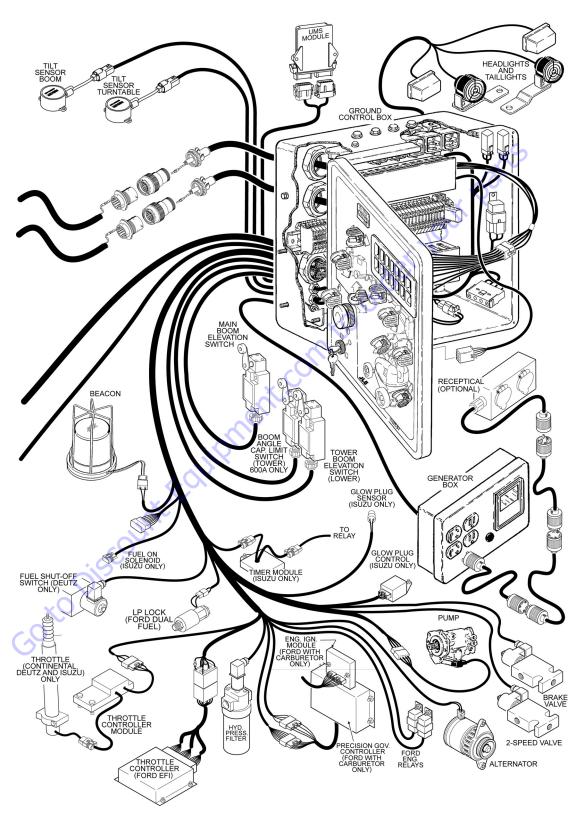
Electrical Components Installation (Prior to S/N 0300064432) - Sheet 2 of 2
